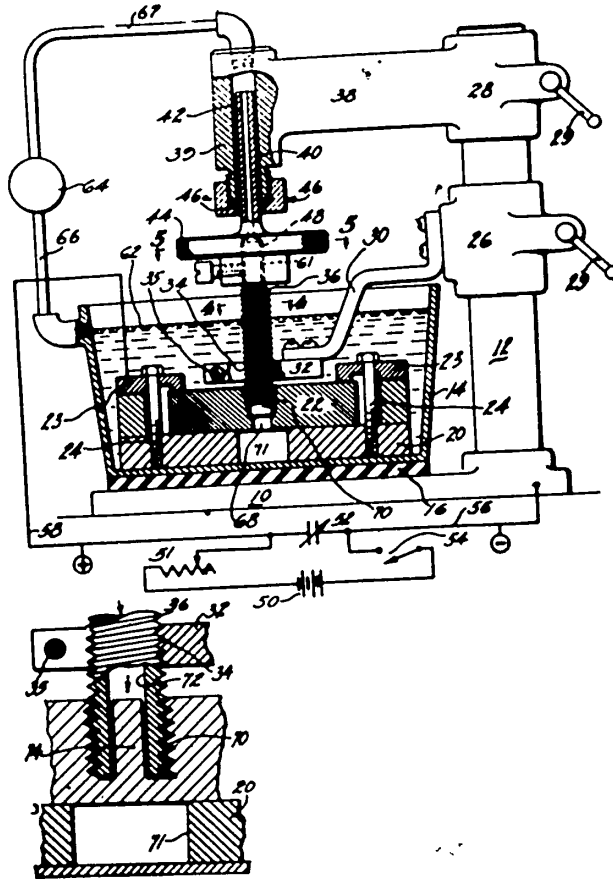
Operating Principle of the Method X Equipment for Thread-Cutting. The thread electrode is brought forward by the thread control 32. At the lower left thread cutting is shown, perhaps in a bottom cavity with simultaneous drilling of the center. Notice that here too Lazarenko's circuit is used. (E.E.Teubner, U.S. Patent No. 2 650 979).
